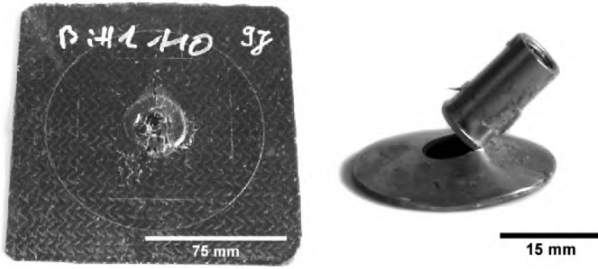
Example of a mixed mode failure of specimens pre-damaged at 9 J.
